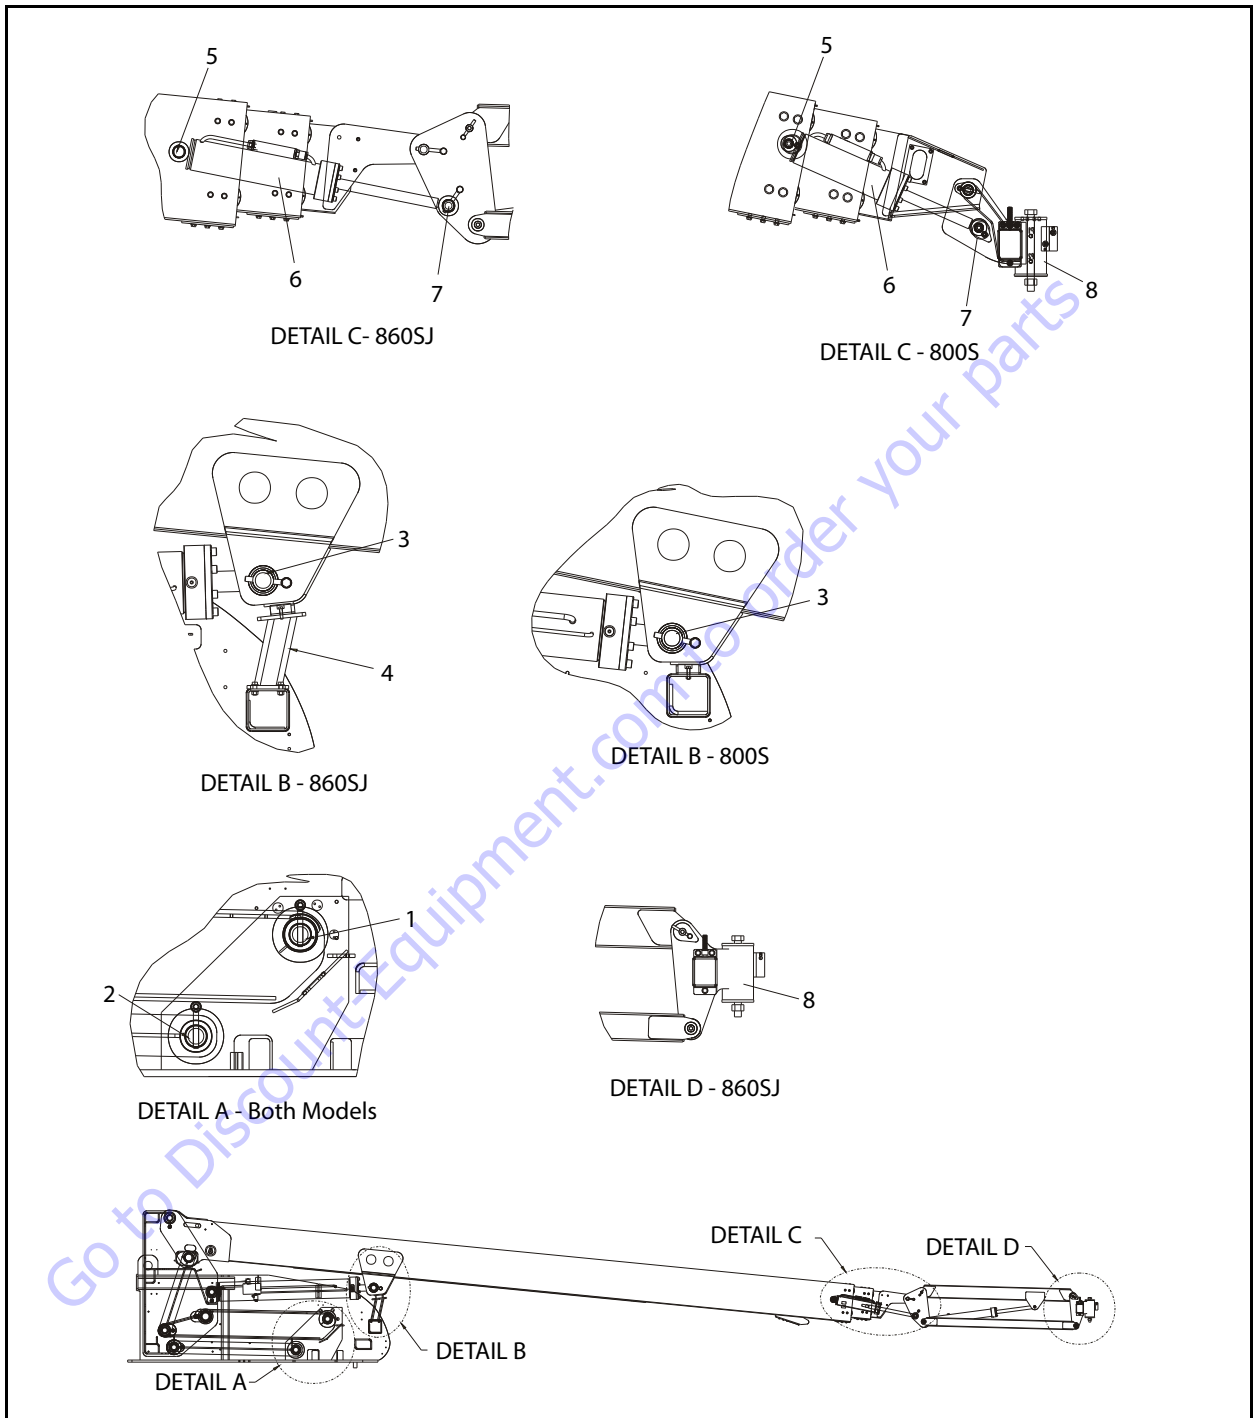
Boom Assembly Cutaway - Sheet 2 of 2
